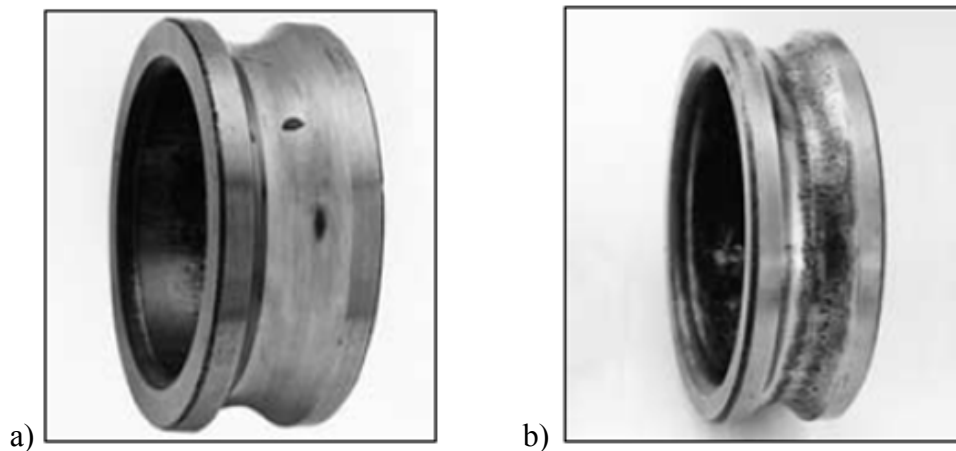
Fatigue damage on inner rings of deep groove ball bearings
